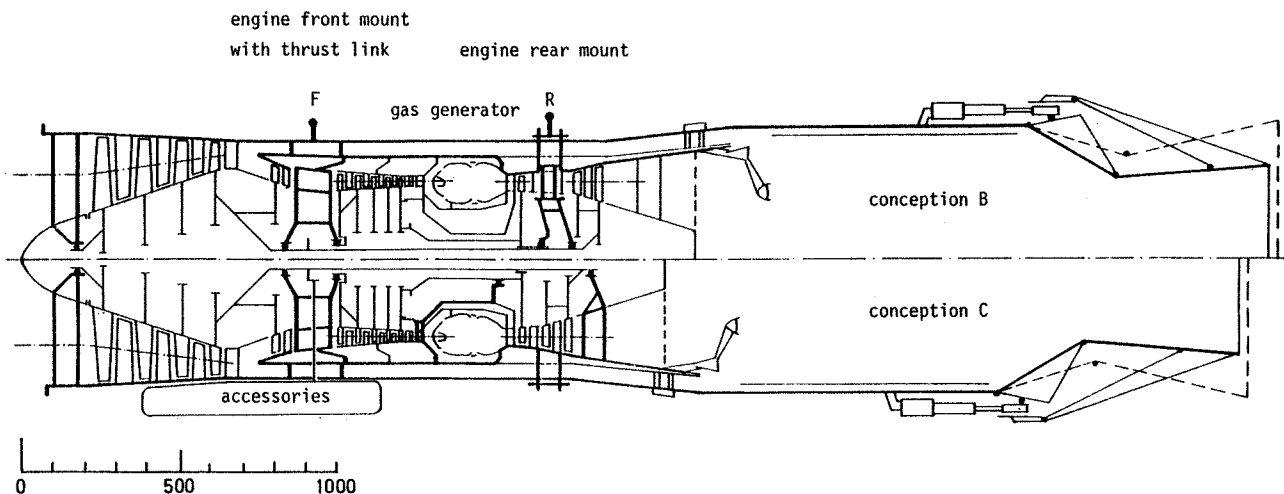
Project of a two-shaft turbofan engine. Bearing structure configurations B and C. True to scale draft.
